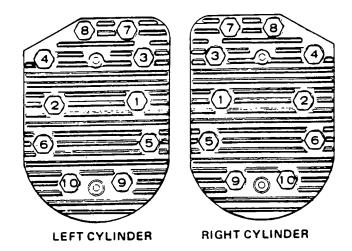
HEAD BOLT TIGHTENING SEQUENCE
